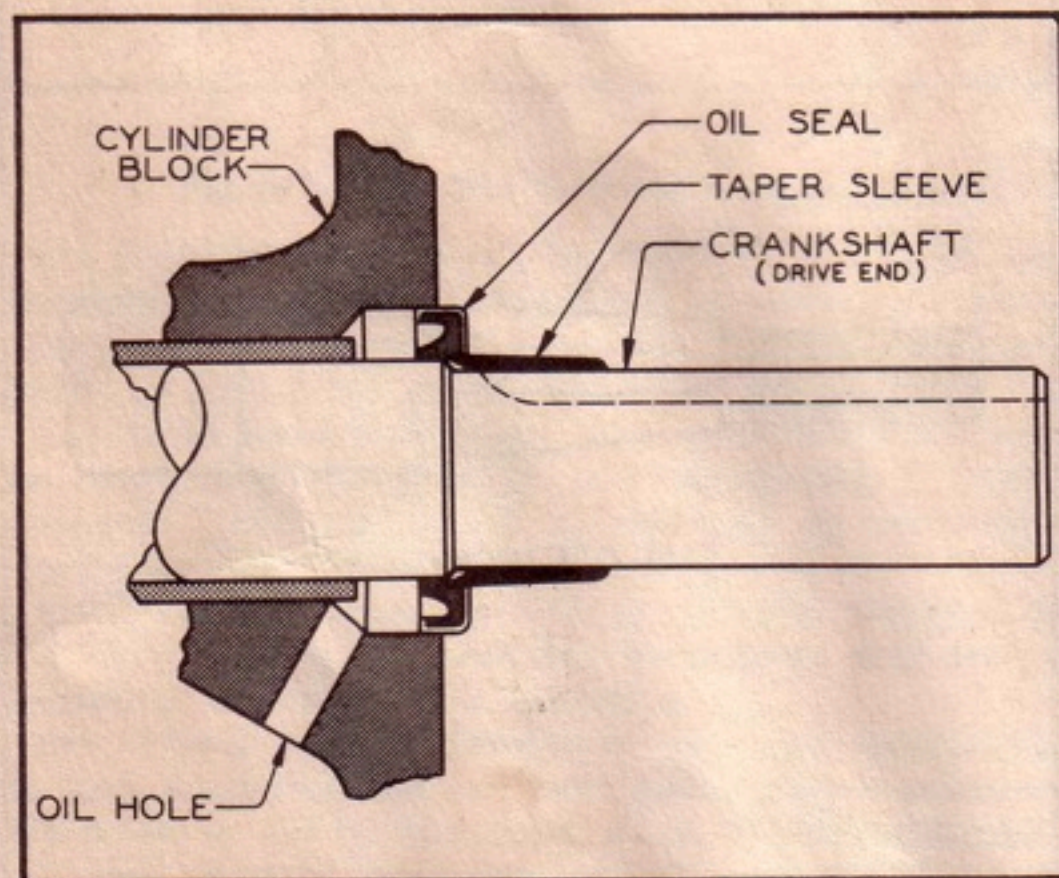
Use of Tapered Sleeve for Installation of Oil Seal
